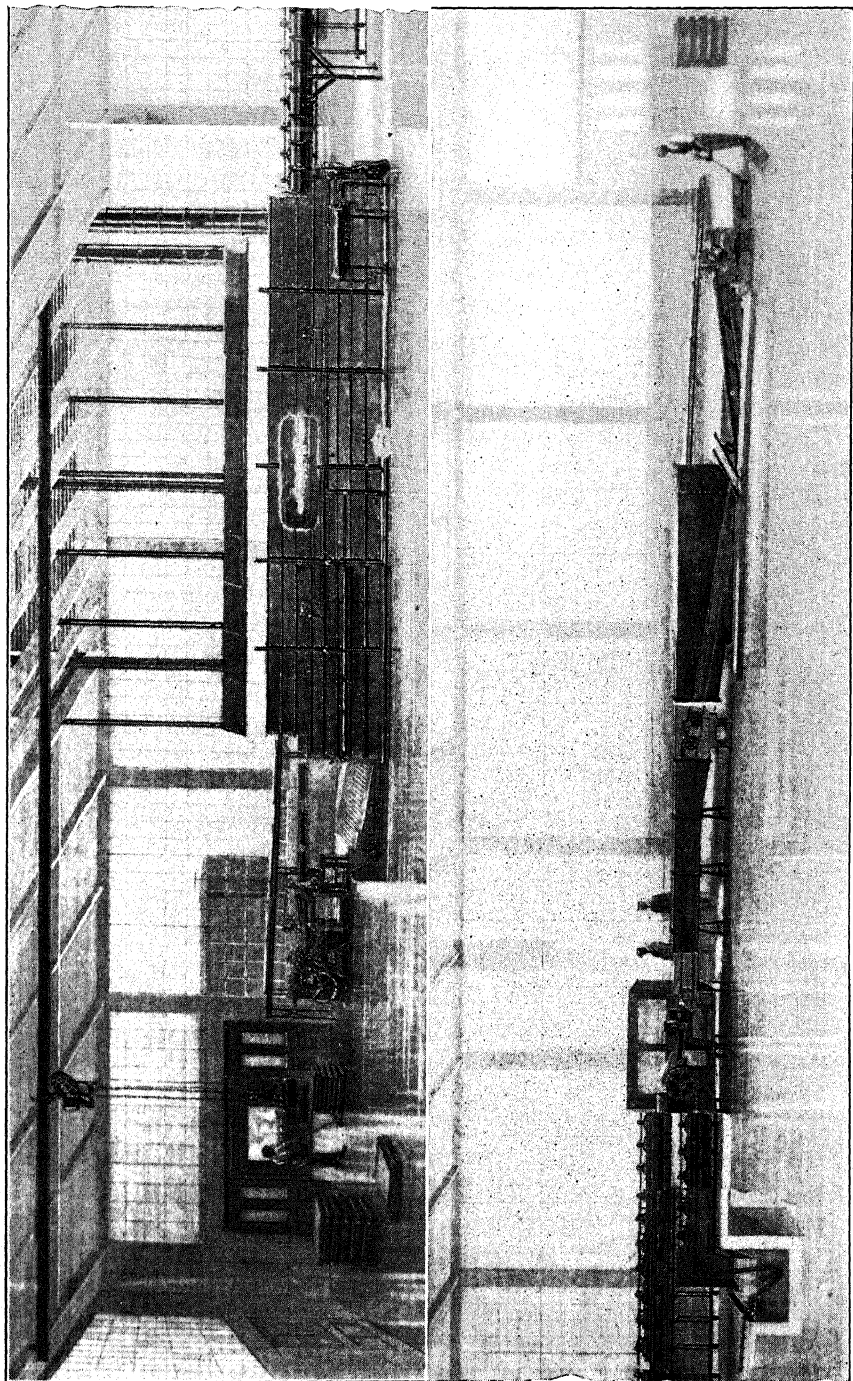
AUTOMATIC FEEDING AND PLATING MACHINE.
